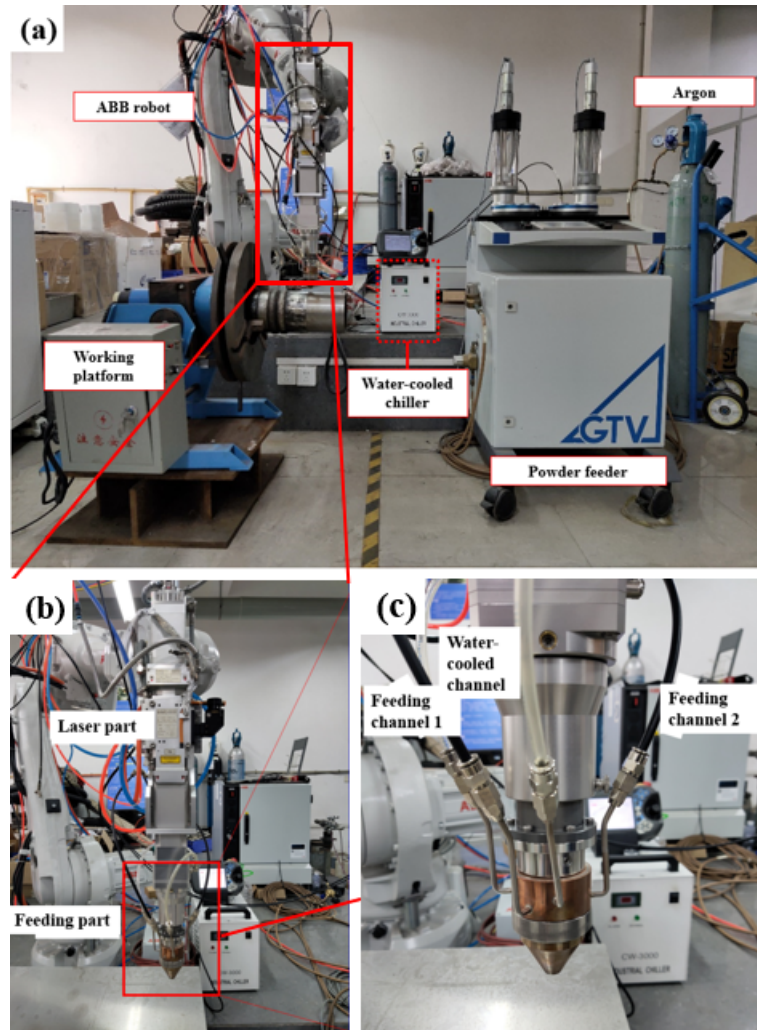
Coaxial feeding system, including ABB robot and feeding machine: (a) Operation system, (b) Laser coaxial powder feeding head, (c) Cladding head parts
